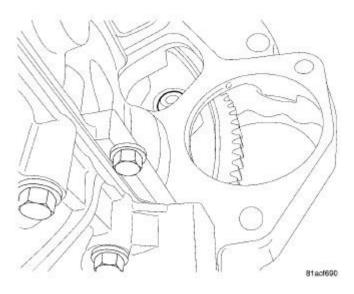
FLEX PLATE BOLTS Courtesy of CHRYSLER LLC
